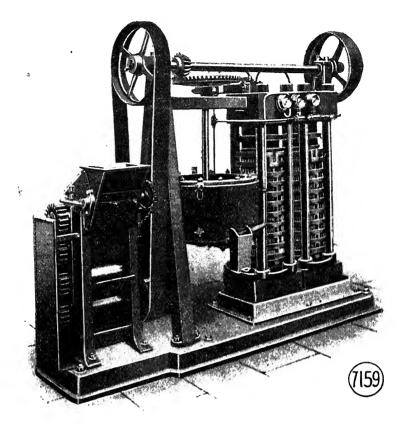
Self-contained Oil Mill, Compressing Rolls, Heating Kettle for Meal, and two "Cage" Presses.
